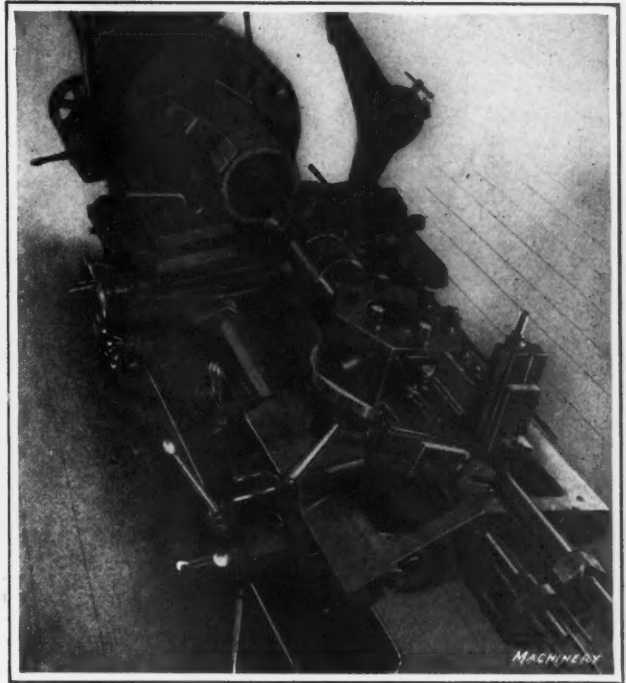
Machine set up for performing Second Operation on Axle Housing
